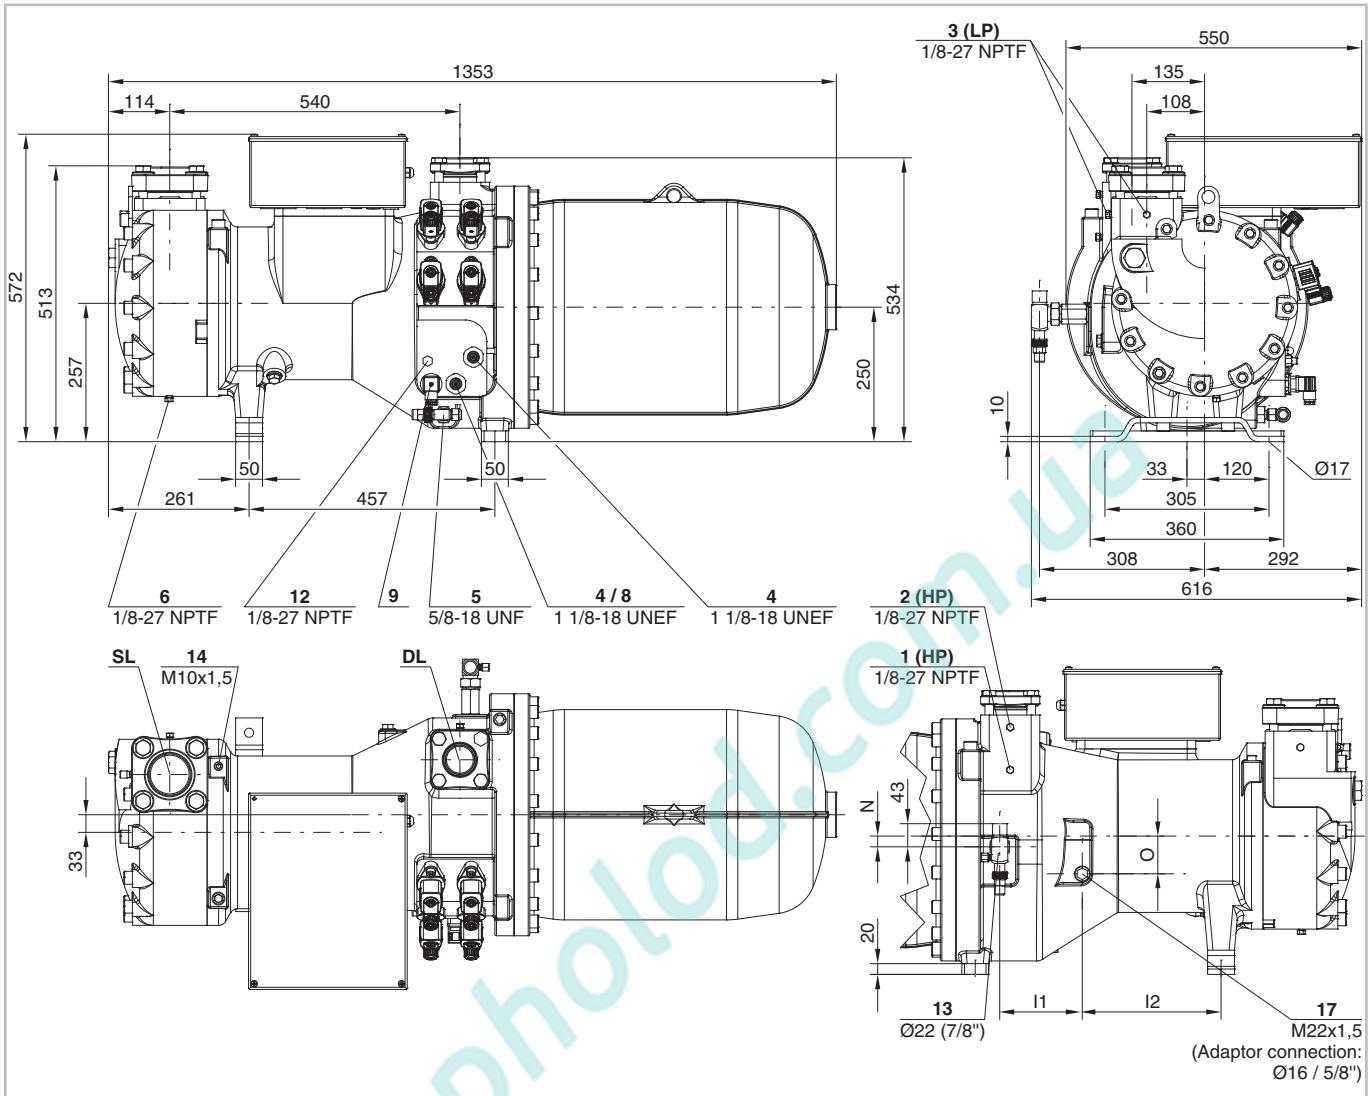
Dimensional drawing CSW7573-60Y .. CSW7593-90(Y), CSH7673-70Y .. CSH7693-90Y
